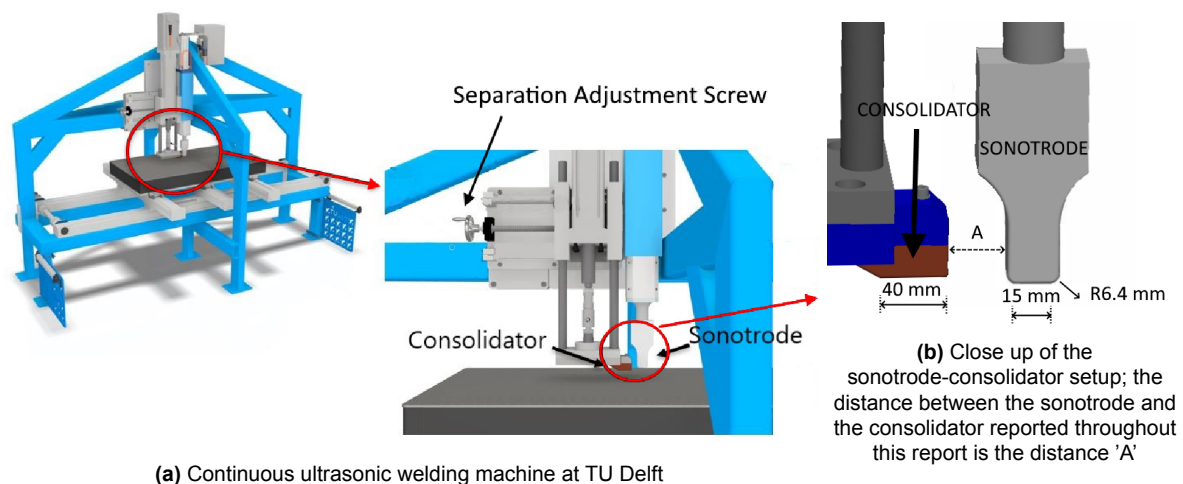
(a) Setup of the continuous ultrasonic welding machine along with the (b) consolidator at TU Delft
